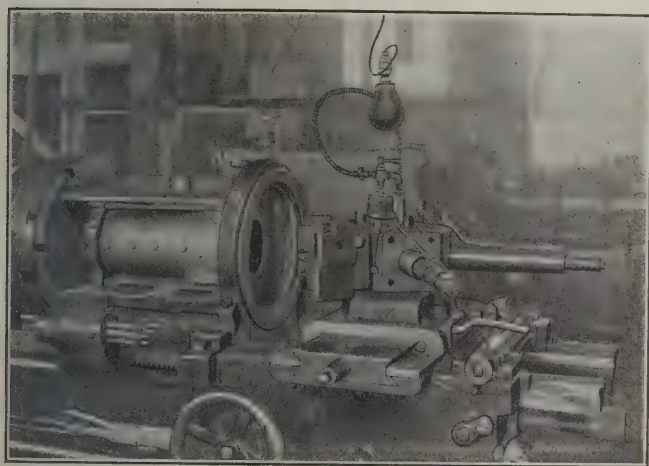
Reversible Revolving Fixture for Boring Crank and Transmission Cases.
